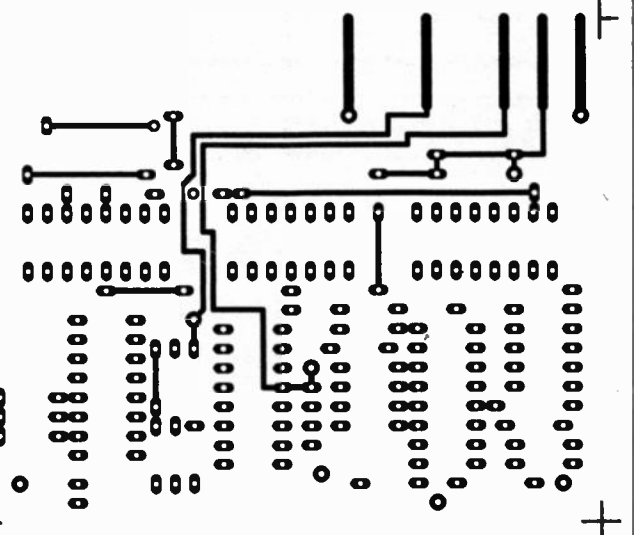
Printed circuit board component layout for the Interface. The topside view shown above left is for a single-sided version with link wires. The final double-sided layout is identical, without the links, and the underside and topside copper foil master patterns are shown above right and below.
